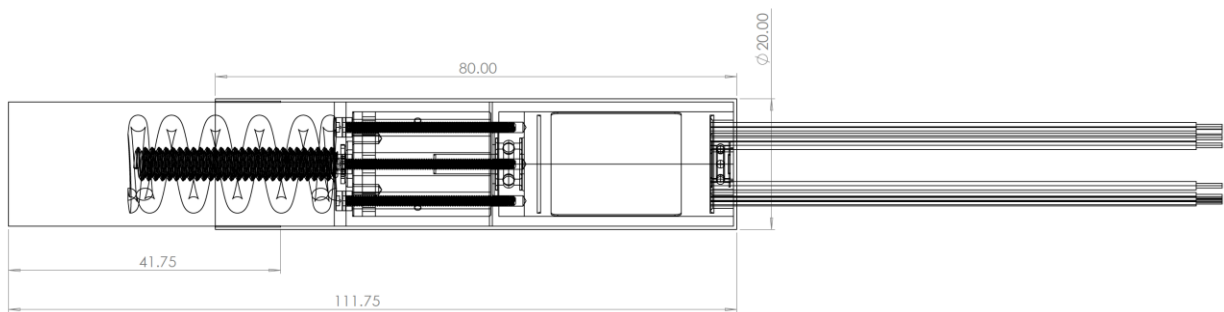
ALTERNATE ASSEMBLY VIEW
